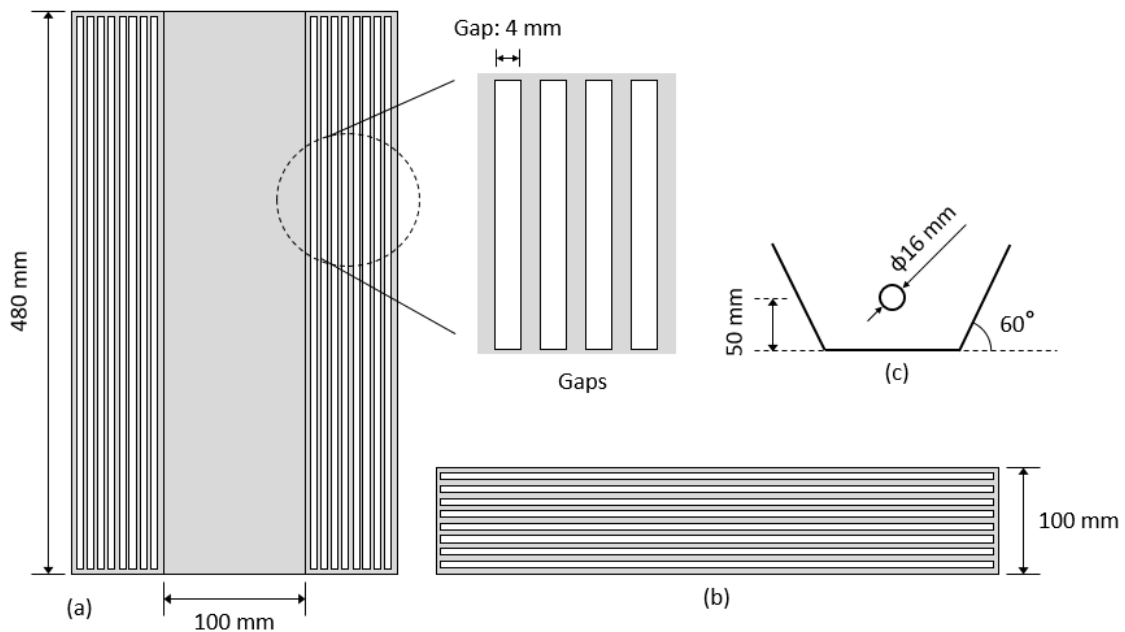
2 Reactor dimensions: (a) top view, (b) side view, (c) cross section view
